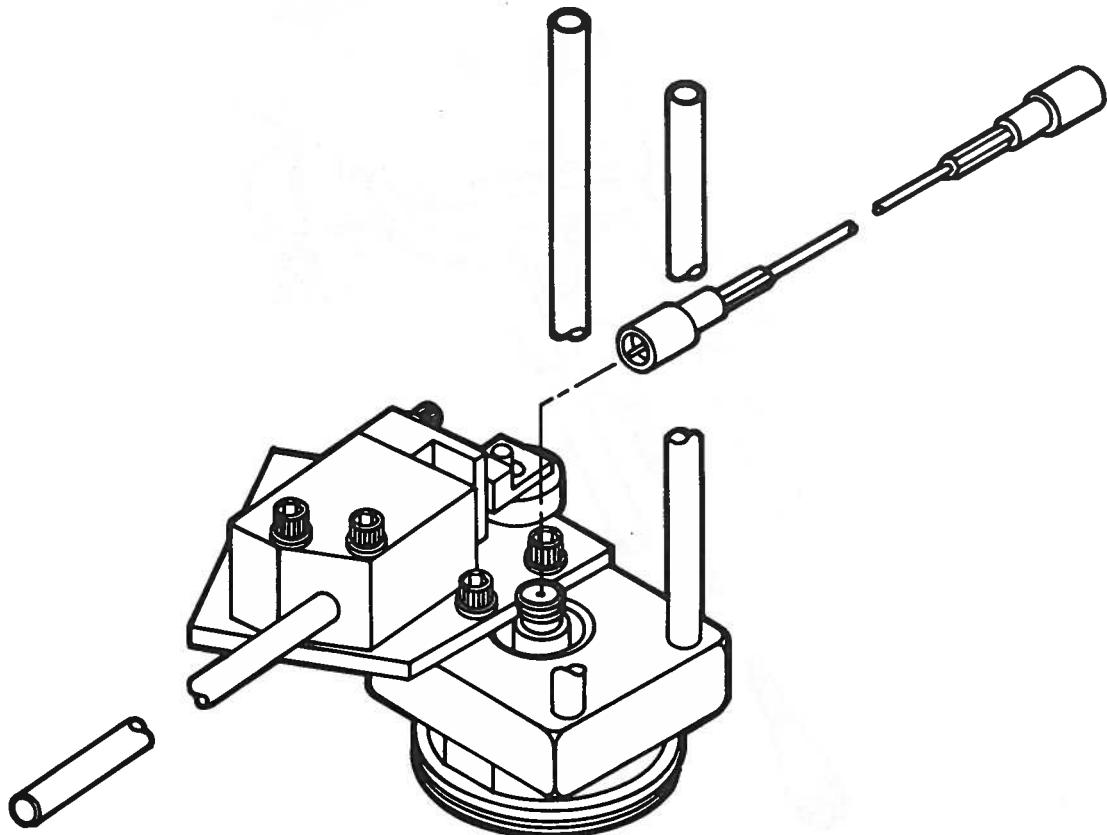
Compact Crystal Sensor with Shutter Assembly
